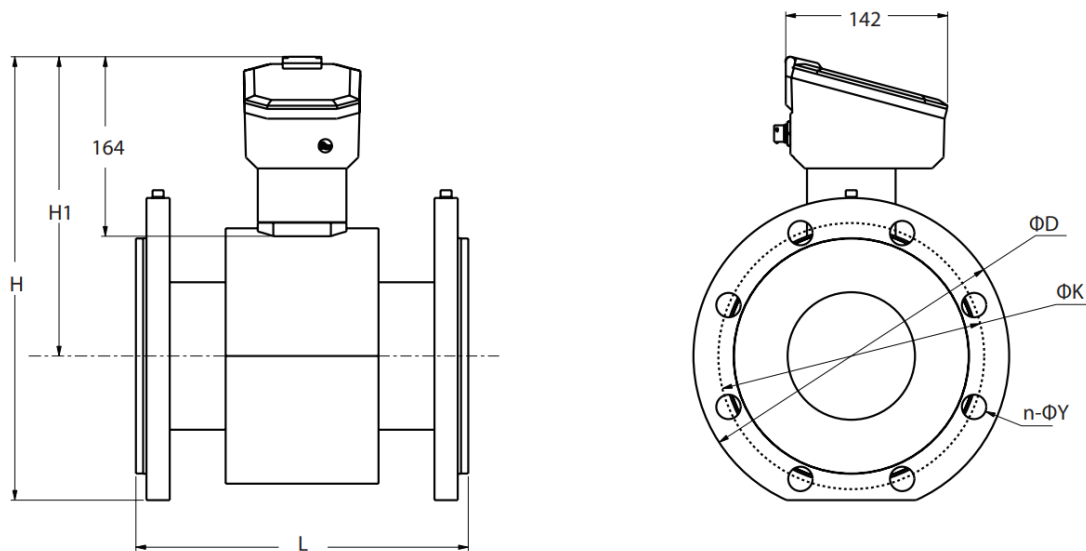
Dimensions of NF1 Integral-Type Water Meter
